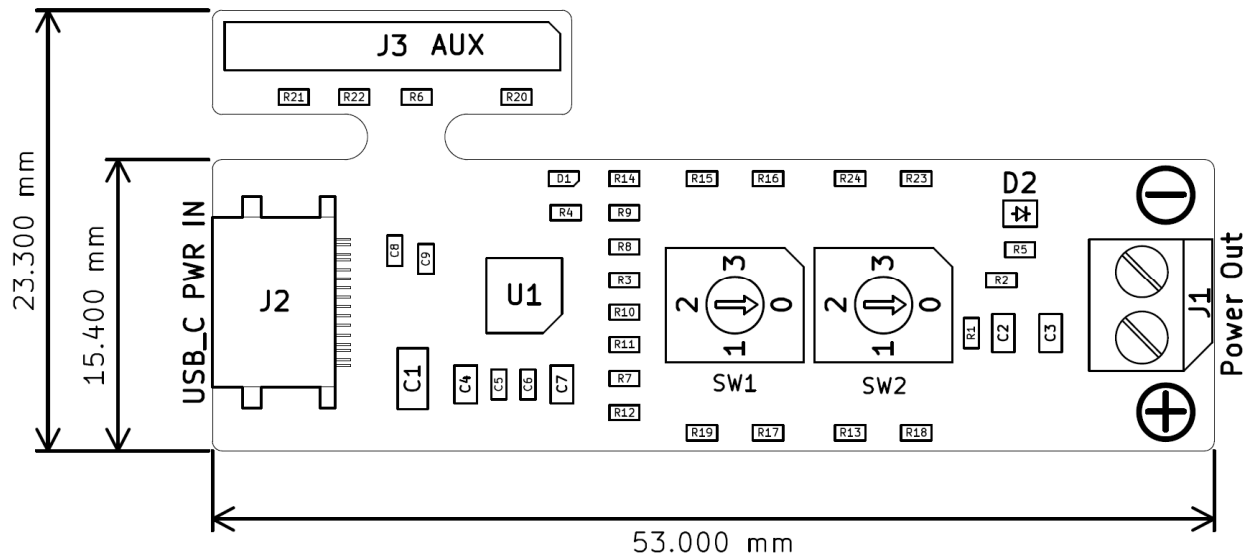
Rev 4.0 Assembly Drawing Top side with component designators
